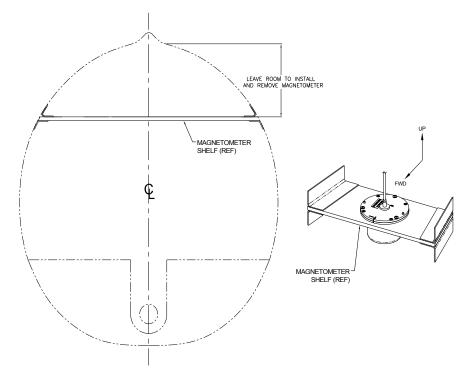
View Looking AFT At Recommended Magnetometer Location
